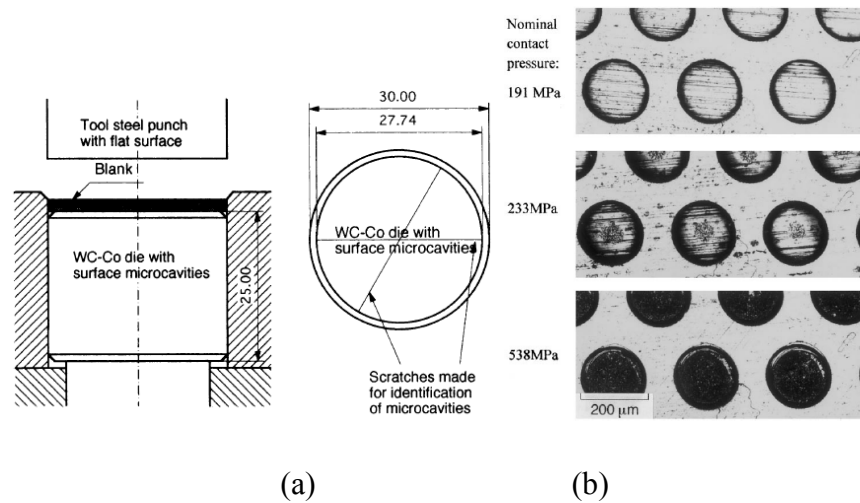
(a) Setup of coining tools in a die set (mm), (b) top view of the formed surface microprojections<sup>126</sup>
